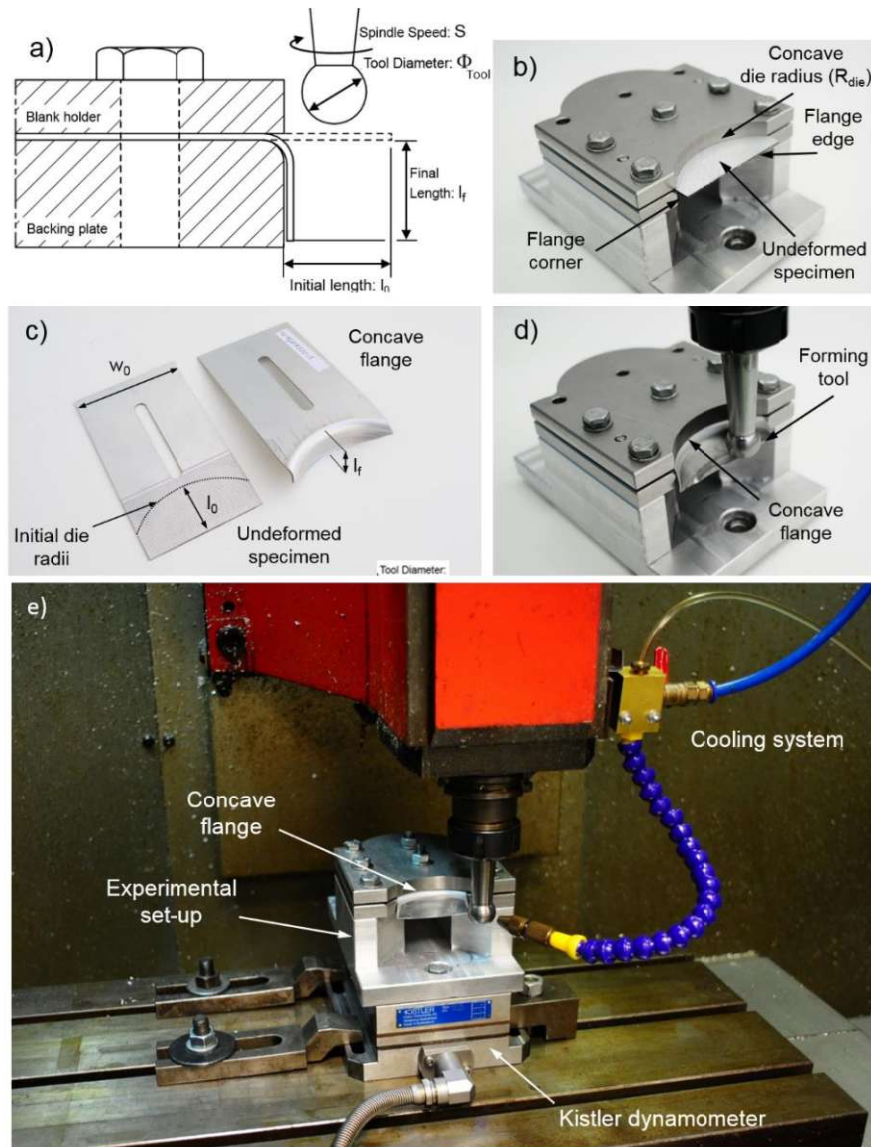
Stretch-flanging by SPIF: (a) Schematic representation of the process. (b) Experimental setup with undeformed specimen, (c) Undeformed specimen and stretch flange manufactured by SPIF, (d) Experimental set up with forming tool and final flange, (e) Actual experimental set-up within CNC machine
